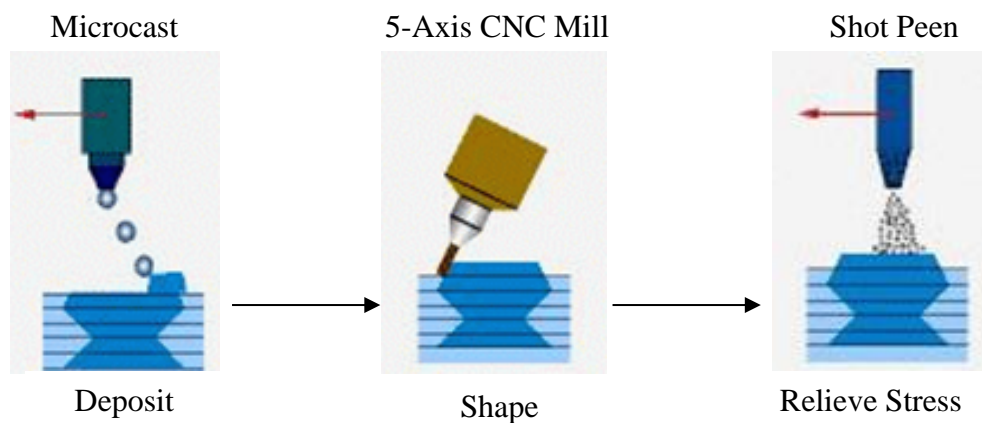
a: The basic steps of Shape Deposition manufacturing process [32]
